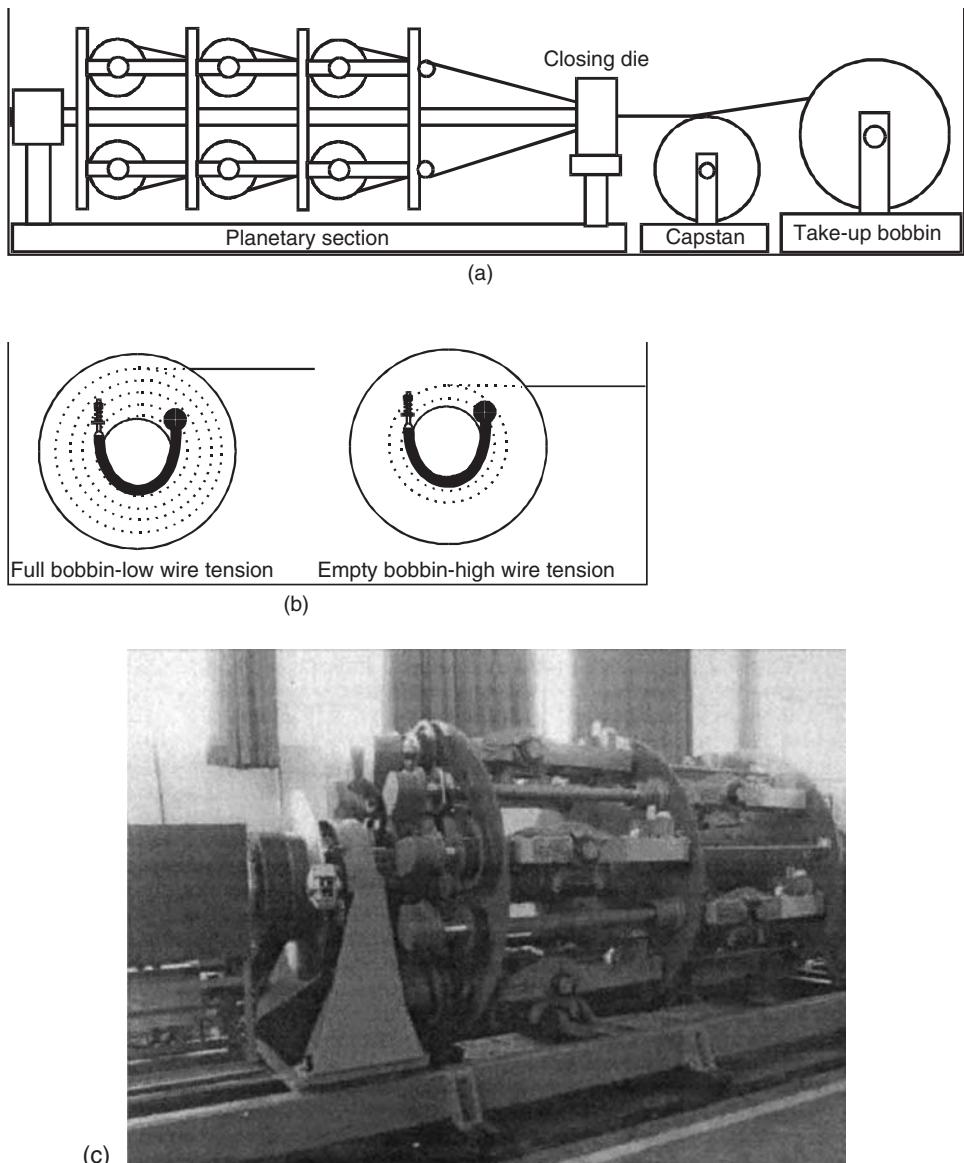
Planetary strander. (a) Schematic arrangement. (b) Rope brake. (c) Commercial machine: OM Lesmo's planetary strander.
